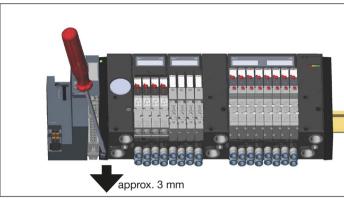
Disassembling the valve block from the standard rail in the control cabinet
